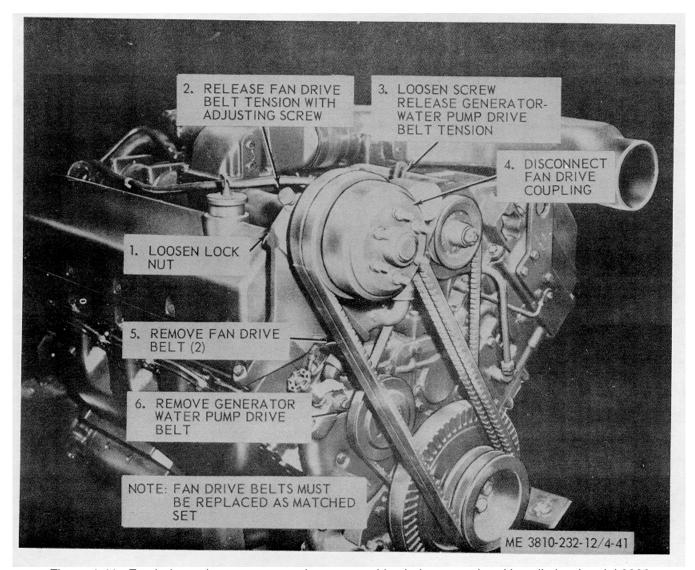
Fan belts and water pump and generator drive belt, removal and installation (model 2380.
